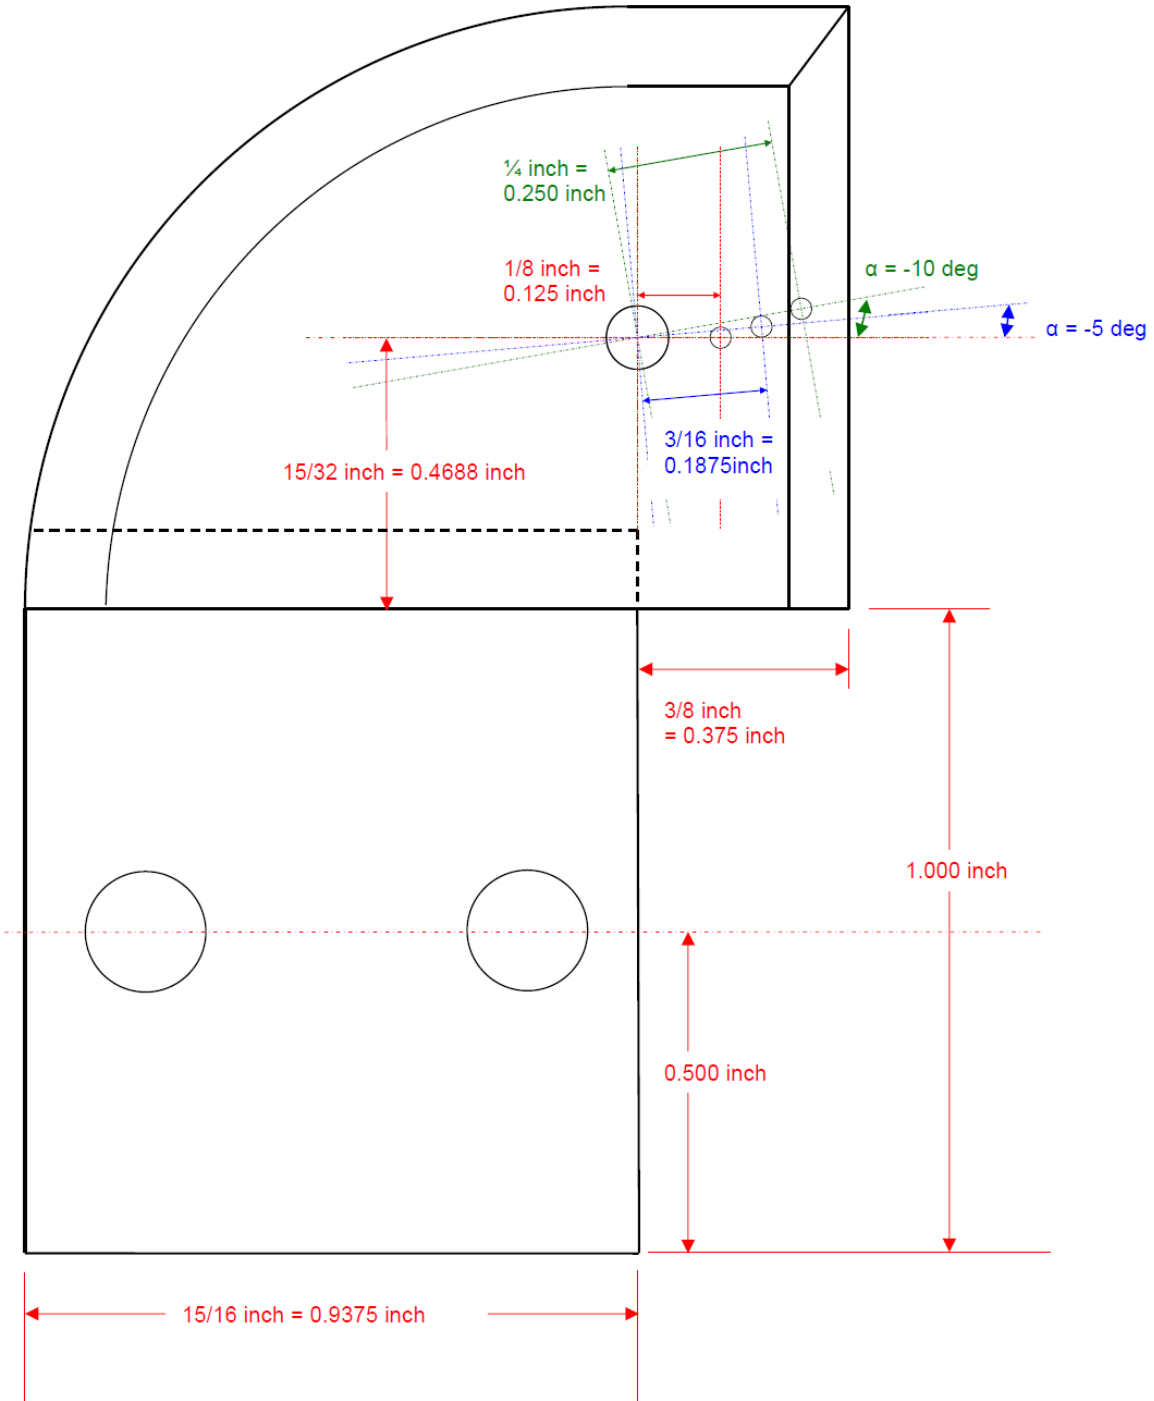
Airfoil Drawing 2 (Pin Hole Locations)
